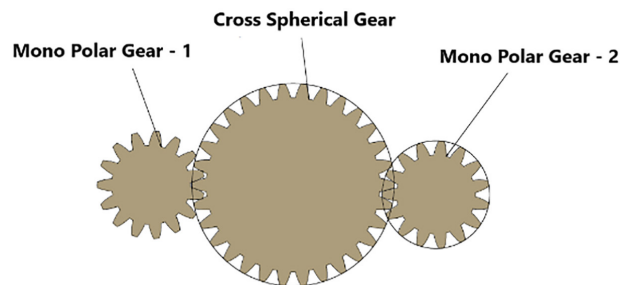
Cross-section of the assembly of the spherical gear and the two monopolar gears
